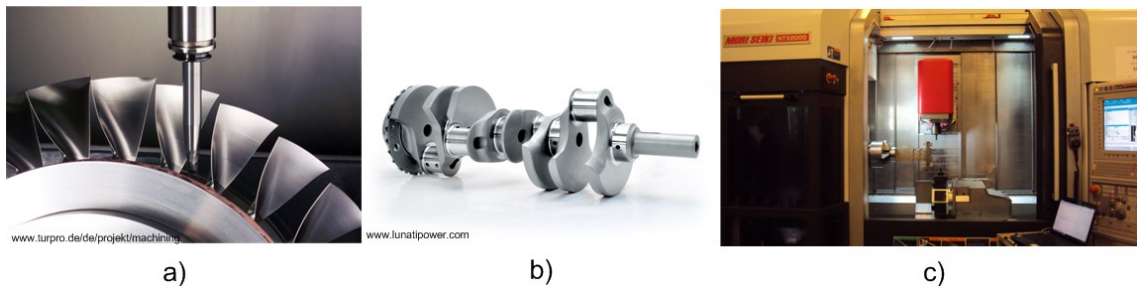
Machined parts (a) blisk, (b) camshaft and machine tool (c) NTX2000 Multi-purpose Machine Tool.
